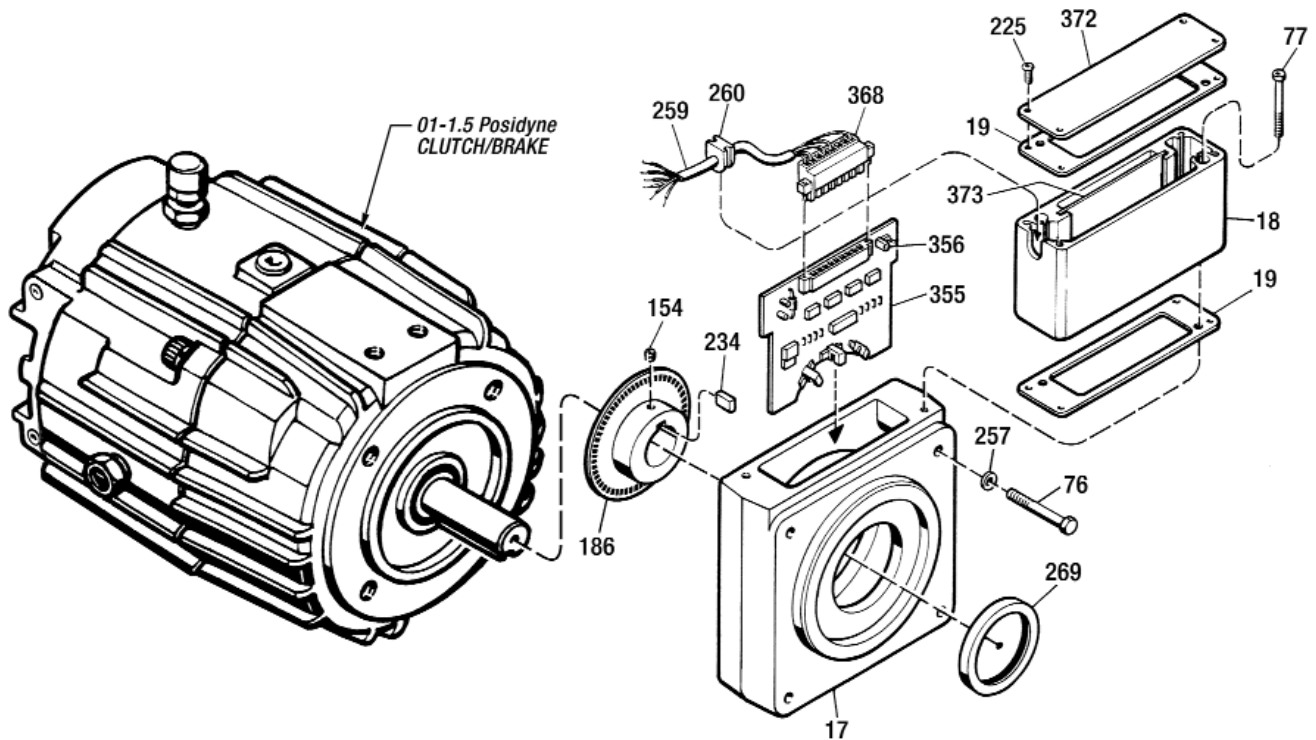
Optional Manifold Mounted Control Valve and Optical Encoder Assembly
